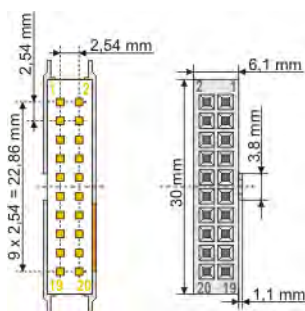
Dimensions of the 20-pin contact strip of the terminal and the matching spring contact strip; for connections see Contact assignment
